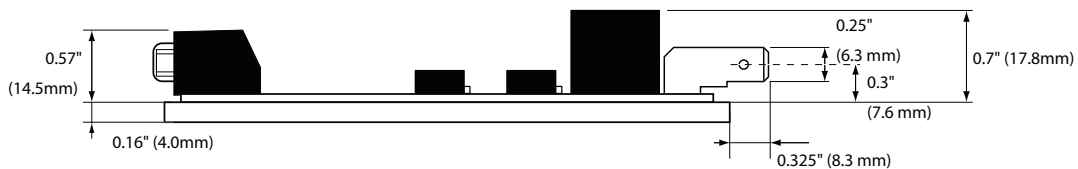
MBL1630/MBL1650 front view and dimensions
